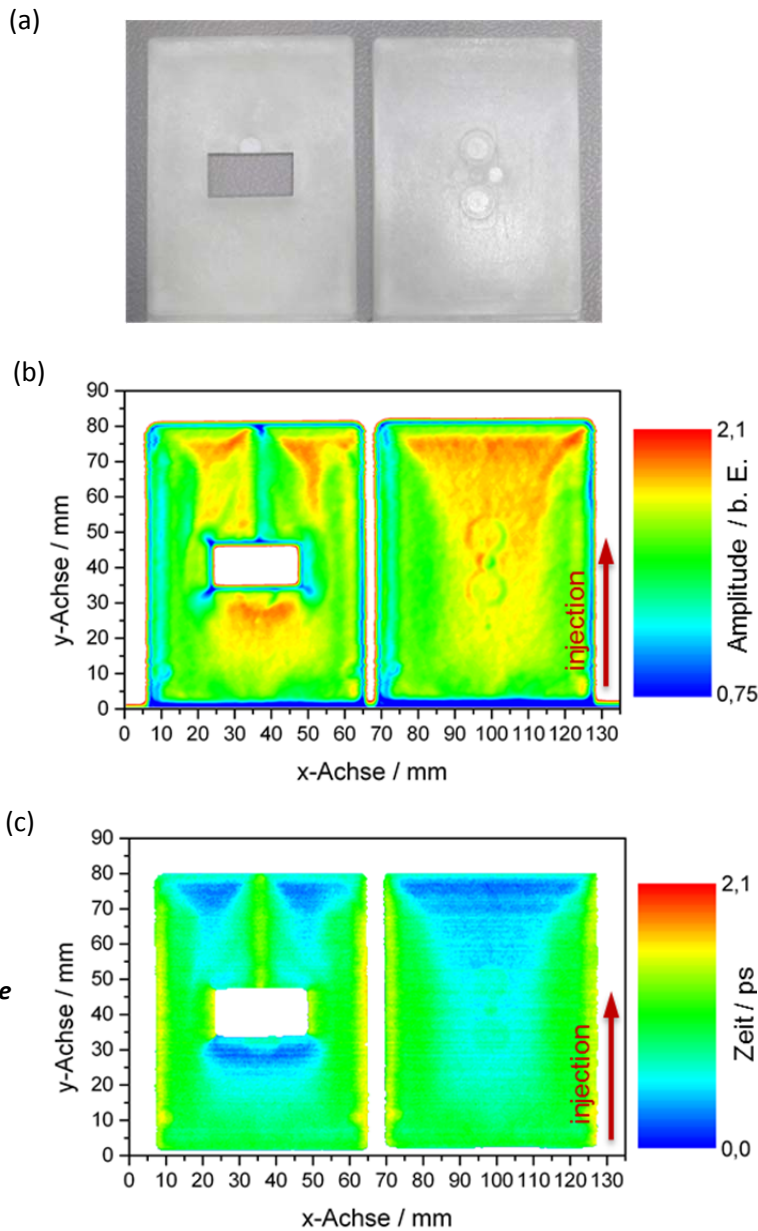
GPR with 30 % fiber content molded into parts with different geometry (a), material injection from the bottom side. The THz amplitude picture (b) and the phase picture (c) both show the weld line and other defects.
